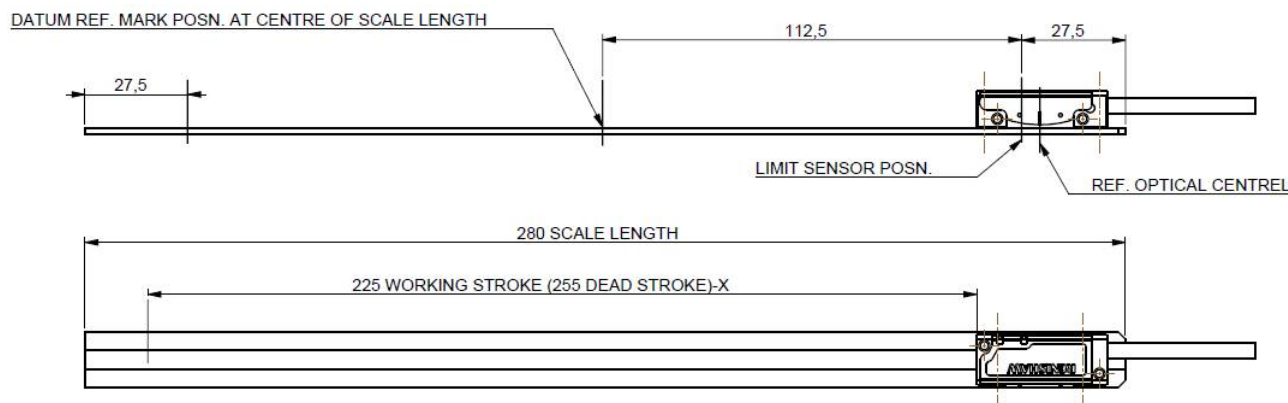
Mechanical drawing of the Renishaw encoder system
